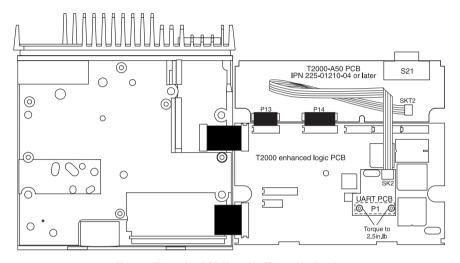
T2000-A66 PCB Mounting (T2000-A50 fitted)
